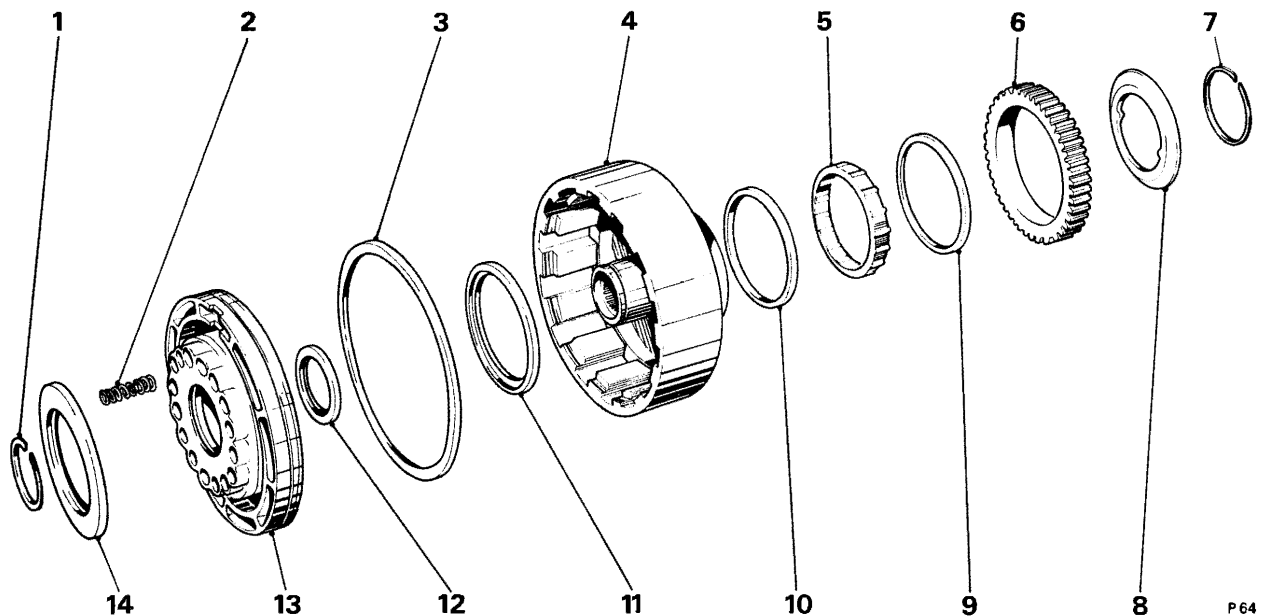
DIRECT CLUTCH AND INTERMEDIATE SPRAG ASSEMBLY
